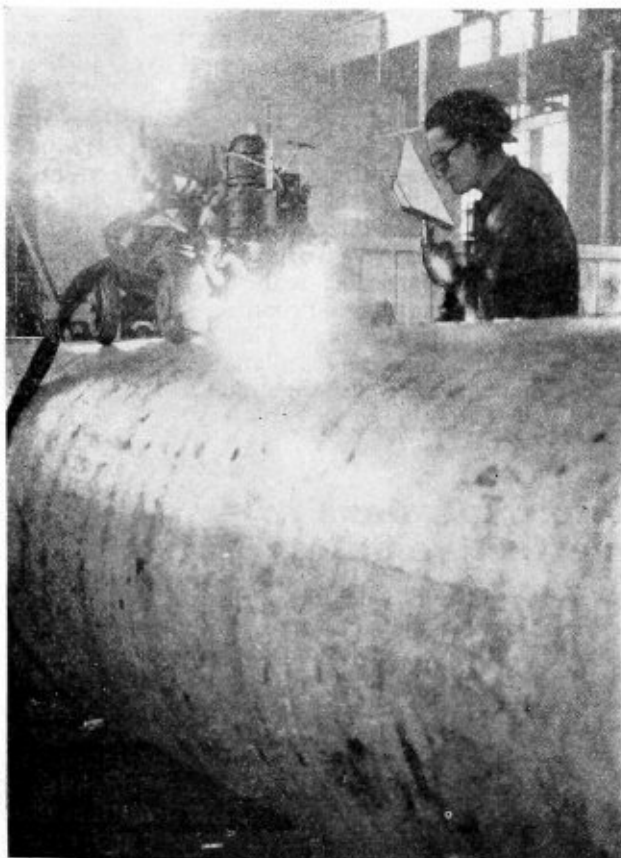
Self-propelled tractor-type electronic-tornado welder
